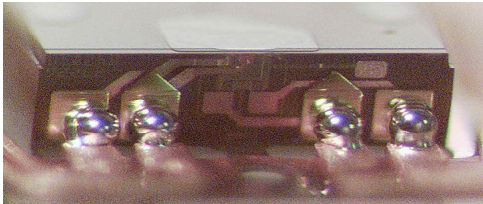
Integrated circuit containing signal conditioning electronics for read-write head of a hard disk drive. IC attached to flex circuit by Solder Jet® technology by placing a solder ball in an inside corner. Pads are 100  $\mu\text{m}$ .
